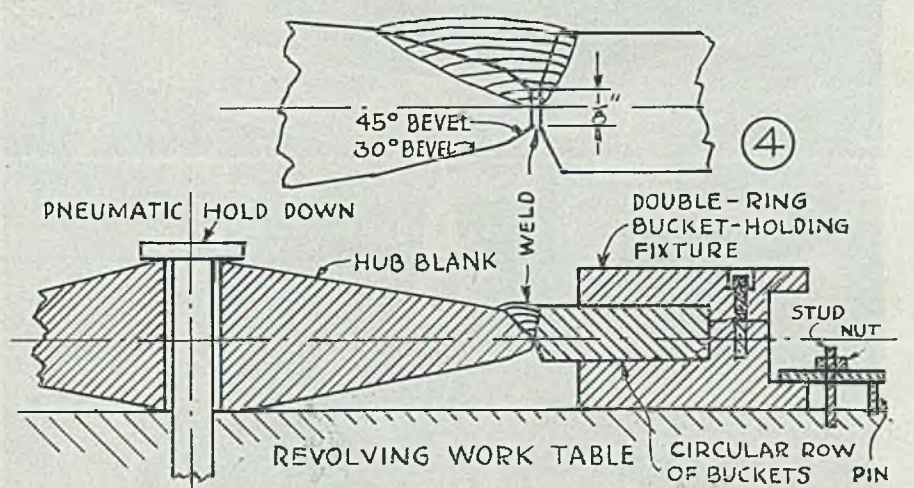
Section through work and fixtures showing details of arrangement for welding turbine buckets to wheel disk. Note enlarged section at weld revealing how joint is prepared for welding. Not to scale
